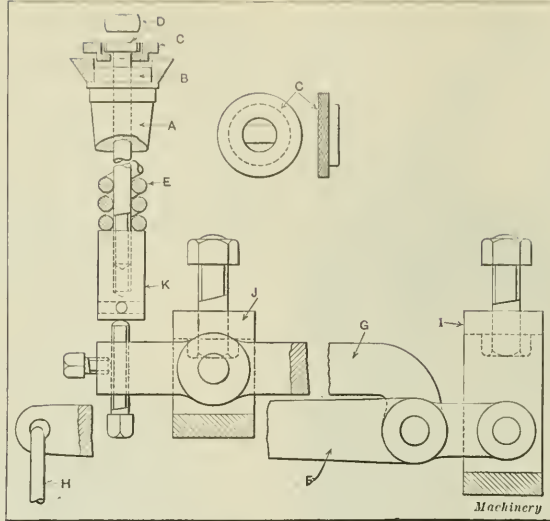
Work-holding Mechanism used on Machine shown in Fig. 9
